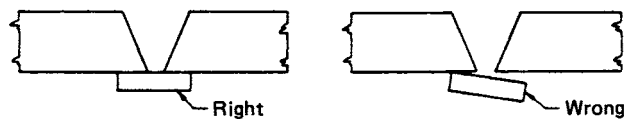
Short, intermittent tack welds should be used to hold the backup strip in place. (*The Lincoln Electric Company.*)
